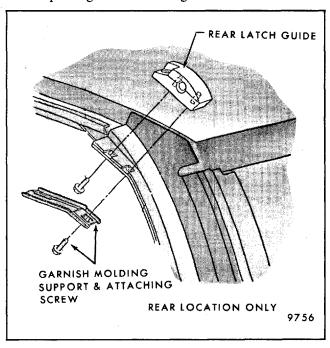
Hatch Roof - Rear Latch Guide Installation
